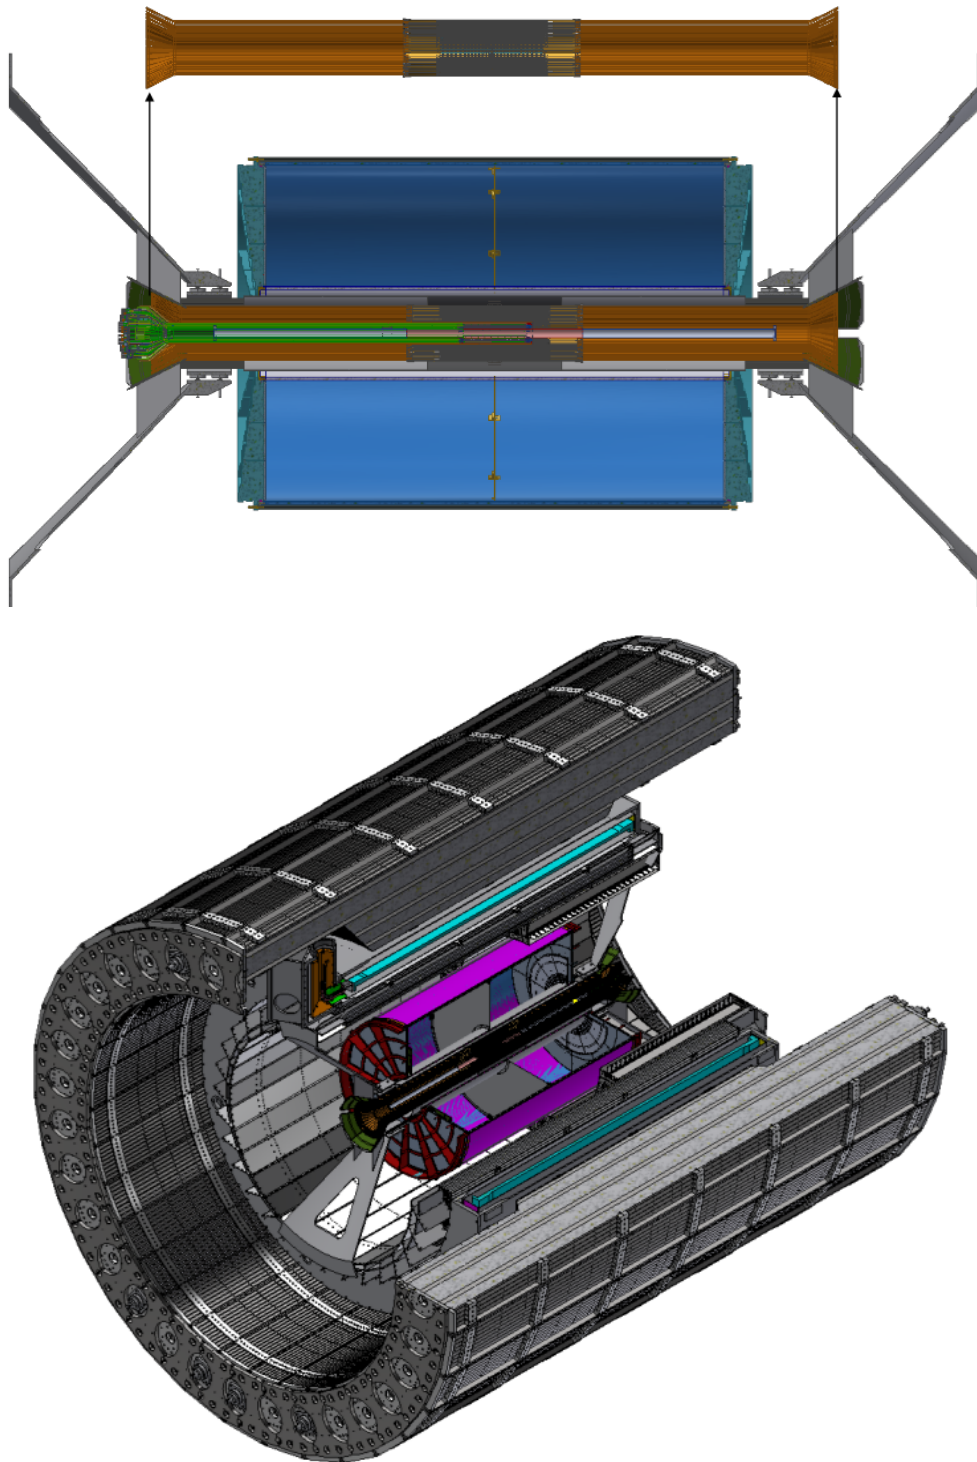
Auto-Cad drawing of of extender cables and cooling in INTT mechanical structure in sPHENIX.
